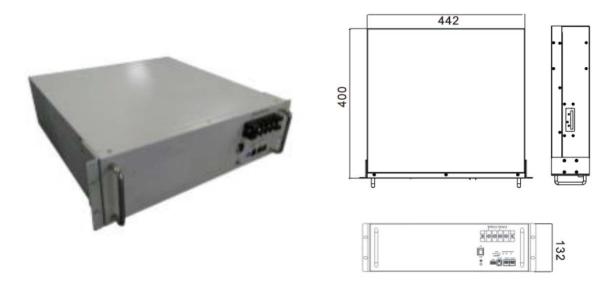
Appearance and Mechanical Drawing of U3C-70P-48V-A
